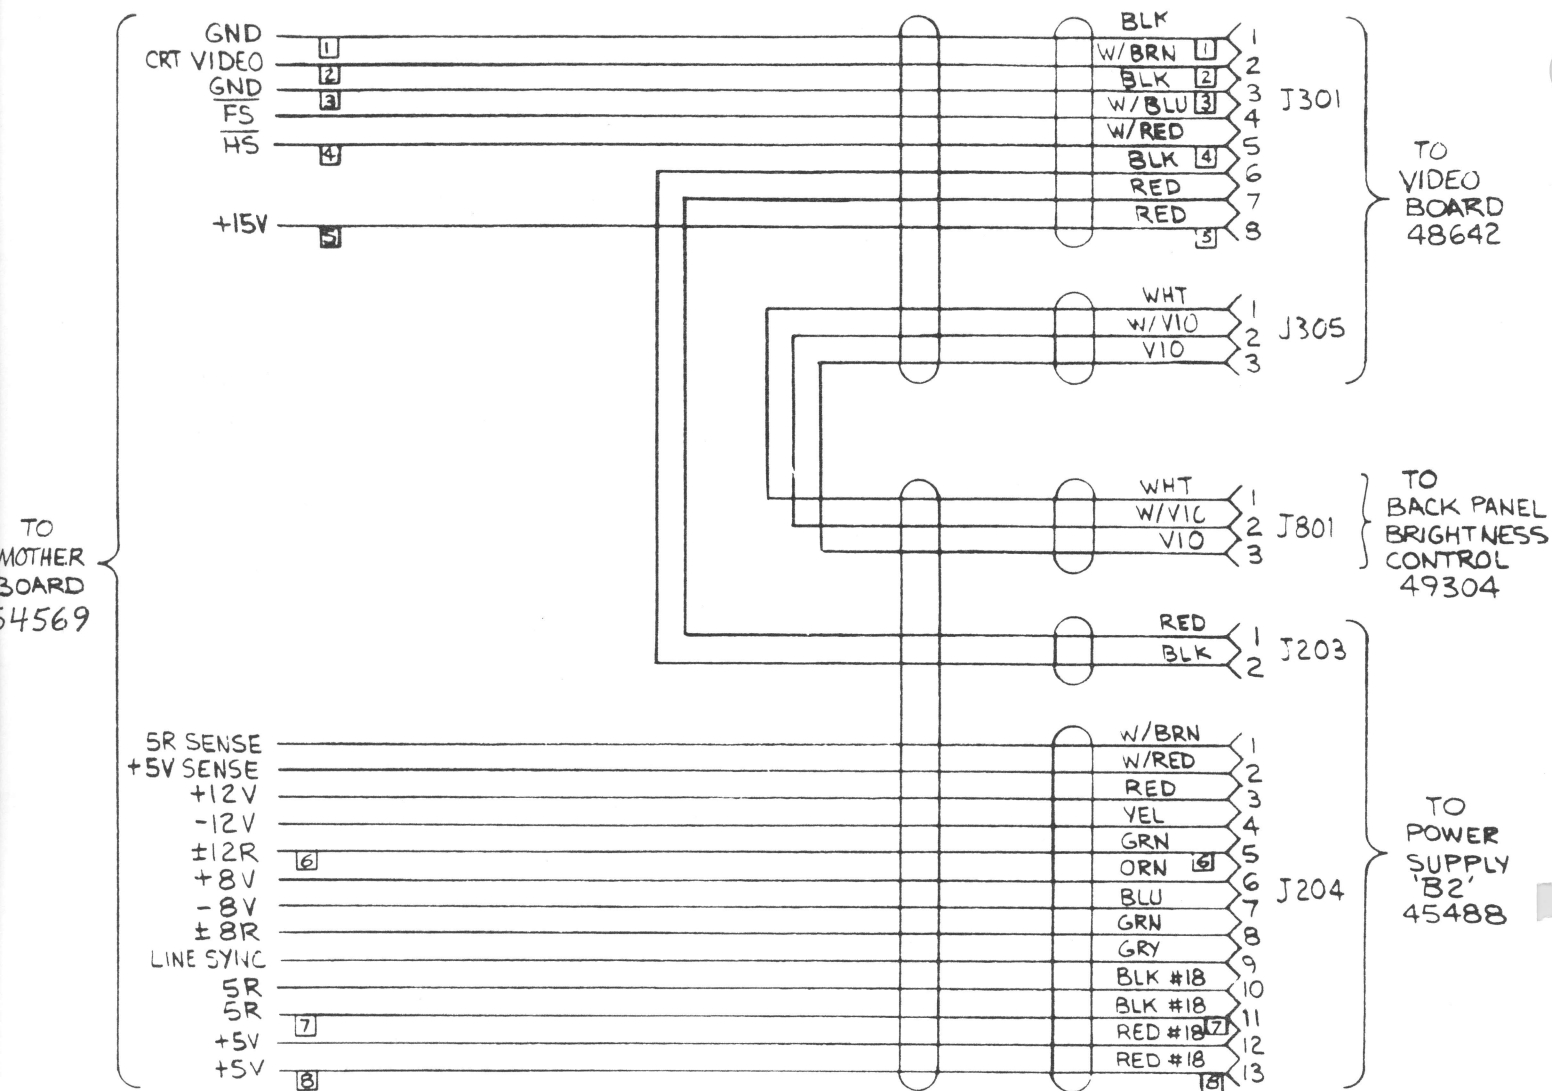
Motherboard Cable Assembly (Part No. 49302)
